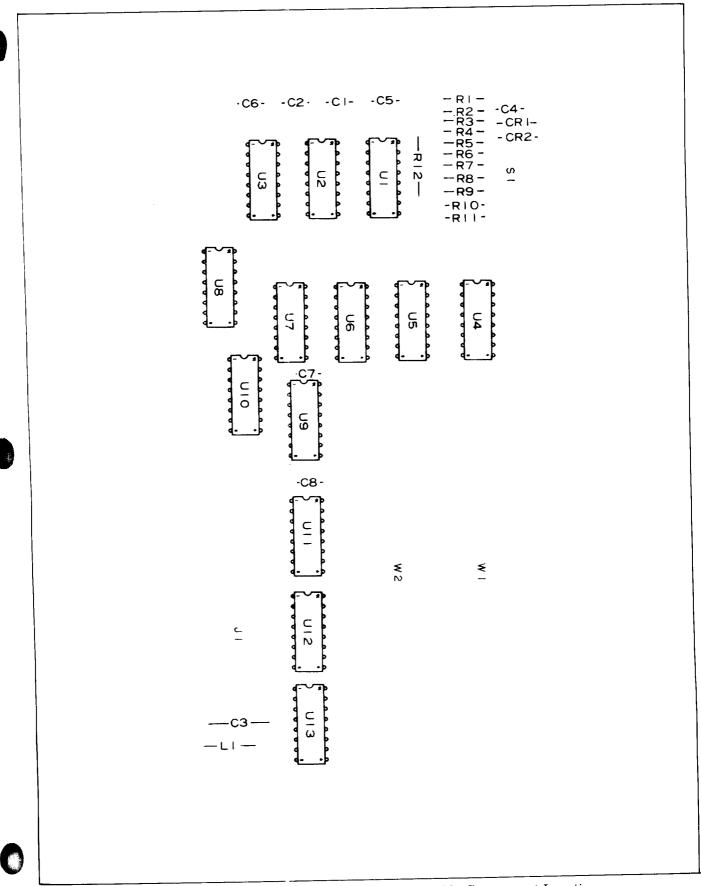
A35 BCD Output Control Board Assembly Component Locations.
